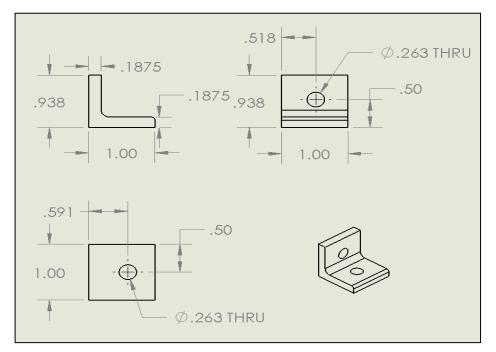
SolidWorks drawing used to make a single corner bracket; four are used in a single pinion motor housing assembly.
